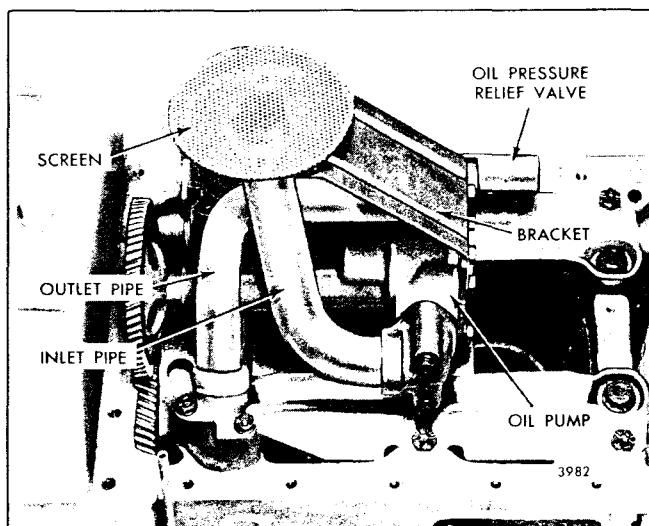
Lubricating Oil Pump Mounting (8V Engine)
